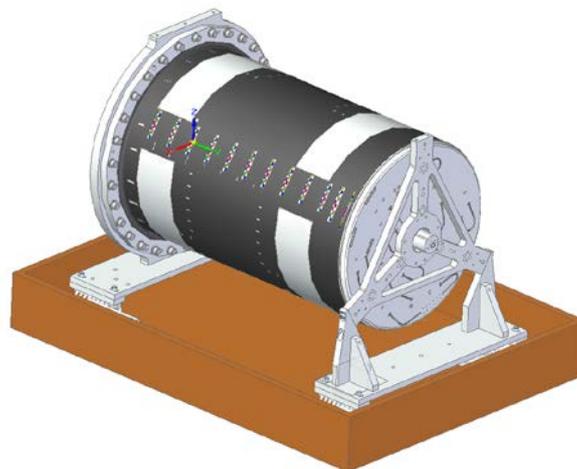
Welded subassembly transport crate (lid not shown)
